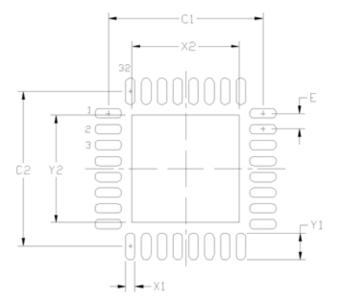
QFN-32 Recommended PCB Land Pattern
